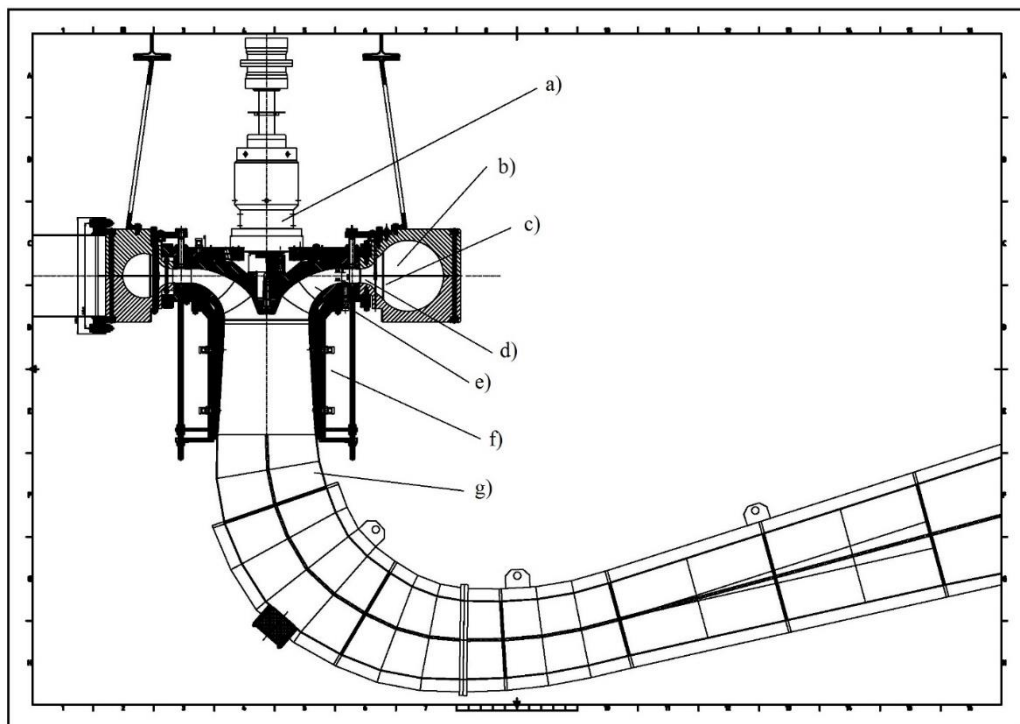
scheme of the turbine: a) the thrust bearing, b) the spiral casing, c) stay vanes, d) guide vanes, e) runner, f) the cone draft tube, g) the draft tube.
